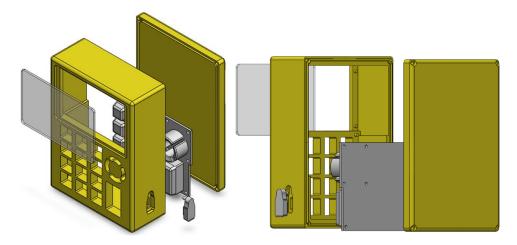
[Left] Front Exploded View and [Right] Rear Exploded View of Shell
